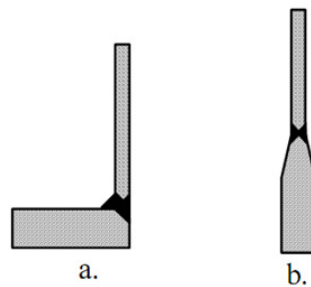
Typical weld details in a tubular tower a) weld at flange b) weld between two cans of different thickness [22]
